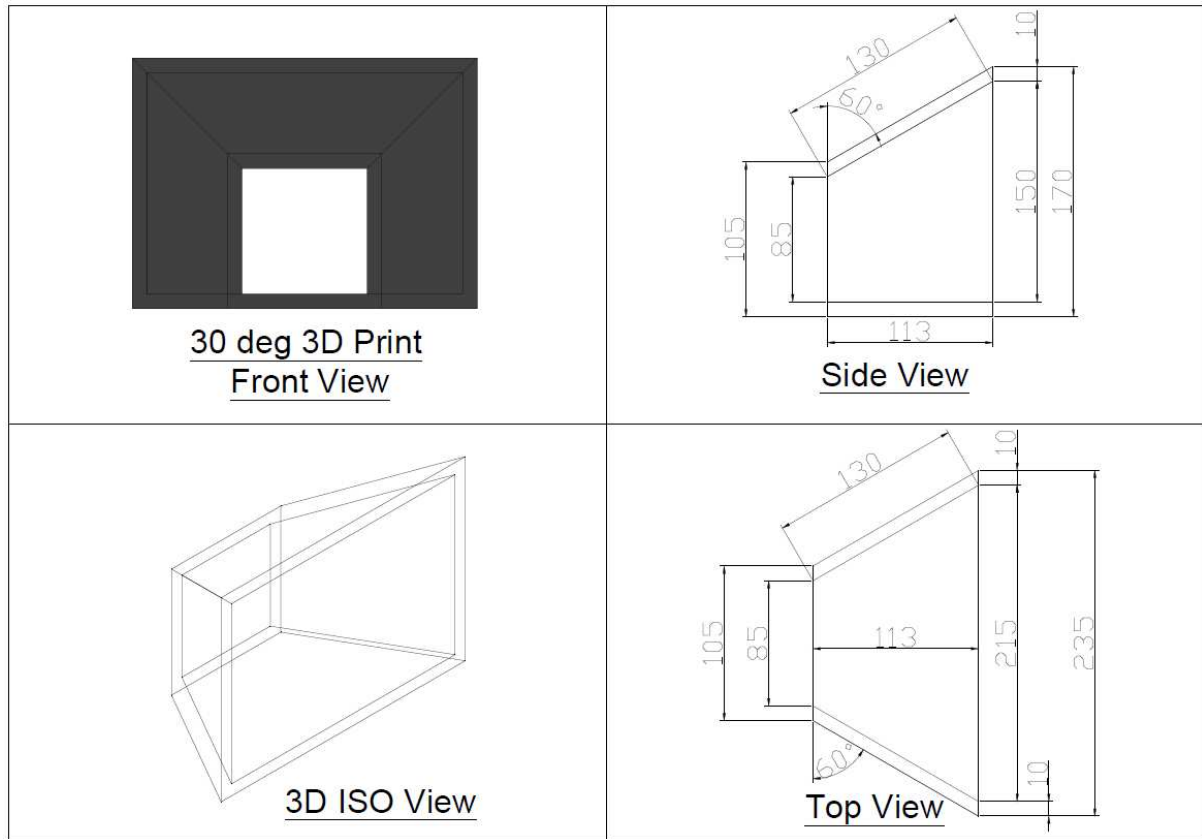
Drawing of the 30 degree headwall / wingwall model
